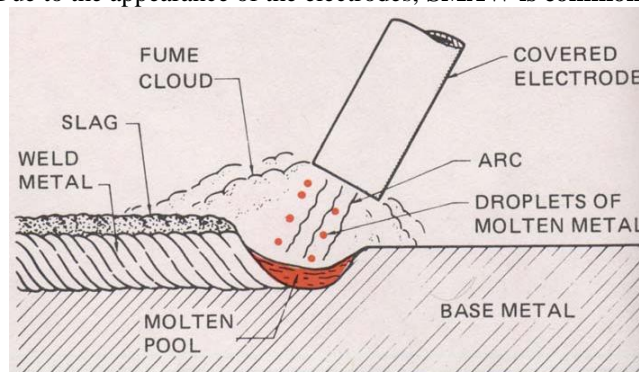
Shielded-Metal Arc Welding (SMAW)
